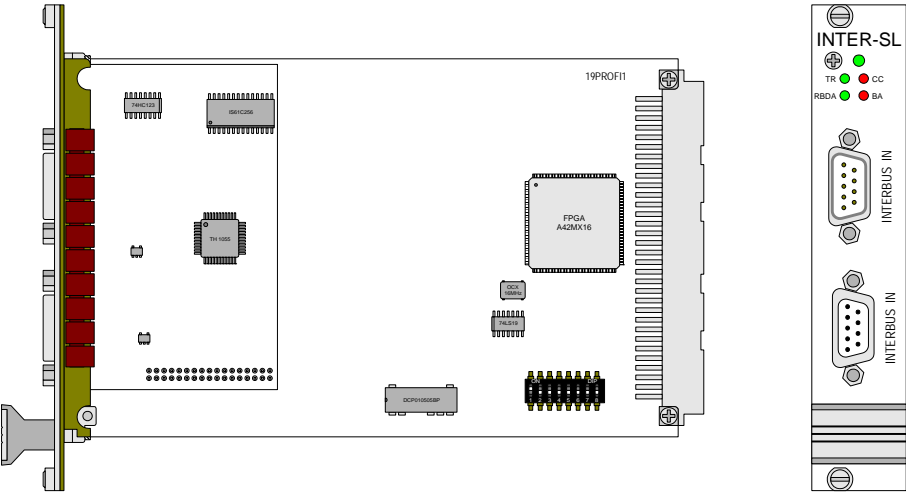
Pro-INTER-SL: Printed circuit board and front panel
